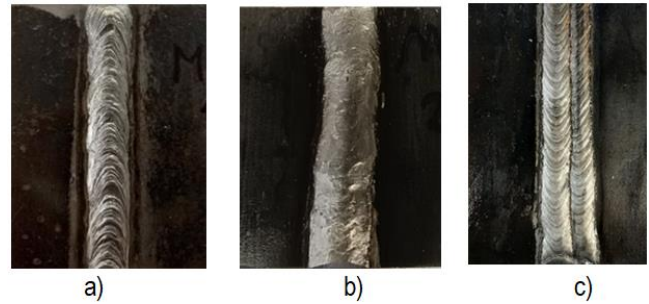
Welded joints produced using various welding methods: a) MMA; b) MIG; c) TIG
